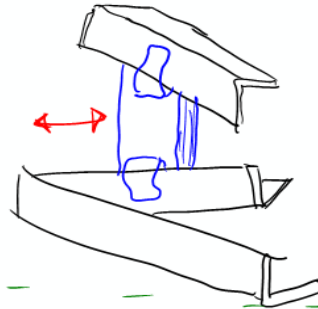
Assembly/disassembly concept sketches, showing vertical and horizontal housing separation.
